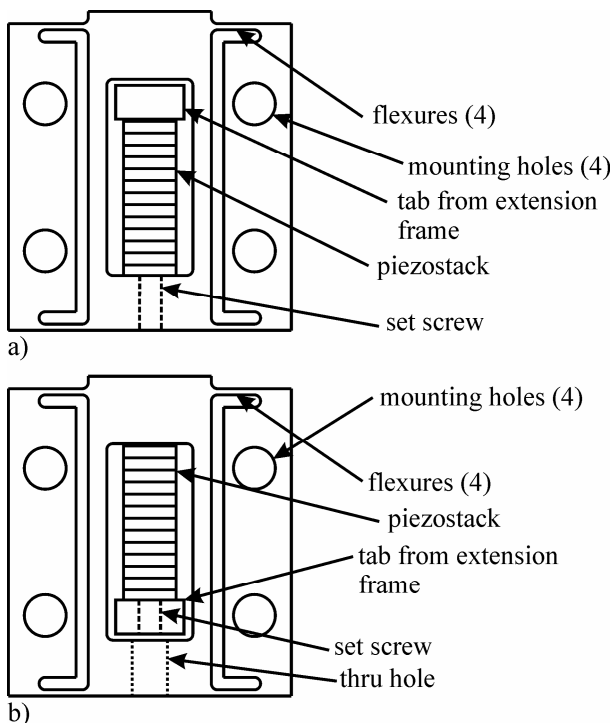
Piezoworm clamp configurations. a) NC clamp, b) NU clamp.
